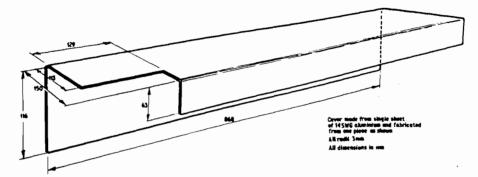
Prototype bending and cutting detail of keyboard cover plate
